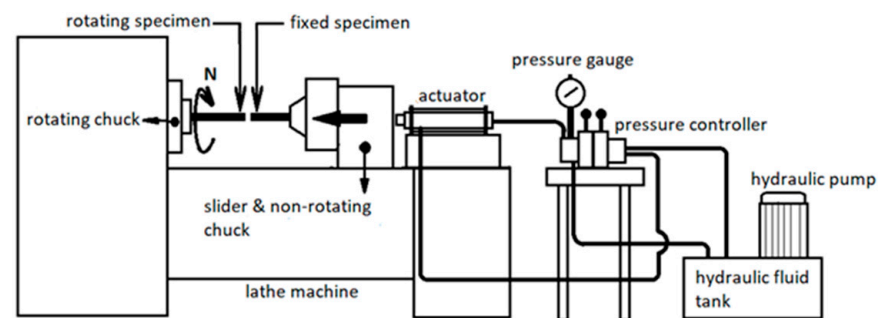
Lathe machine equipped with hydraulic pack for RFW process.
